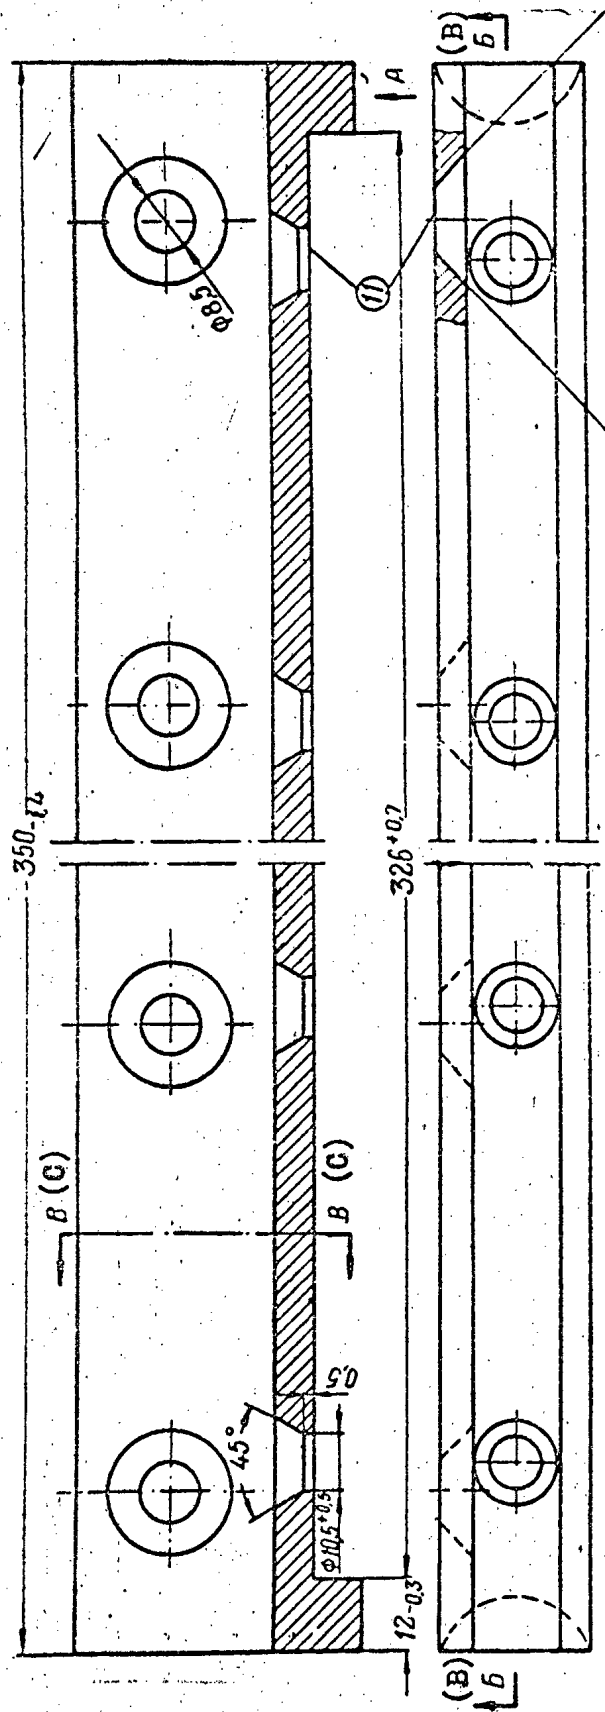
01-52 -- cradle guide; 01-53 -- screw
